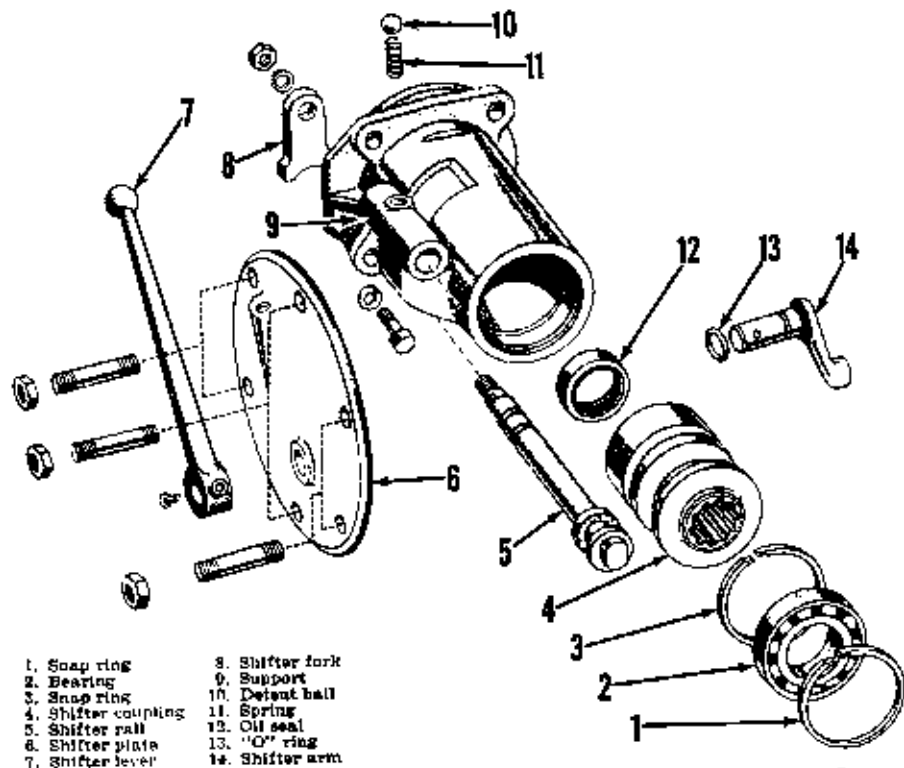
Exploded view of pto shifter mechanism and front bearing support. Support (9) also functions as transmission countershaft rear bearing support.
